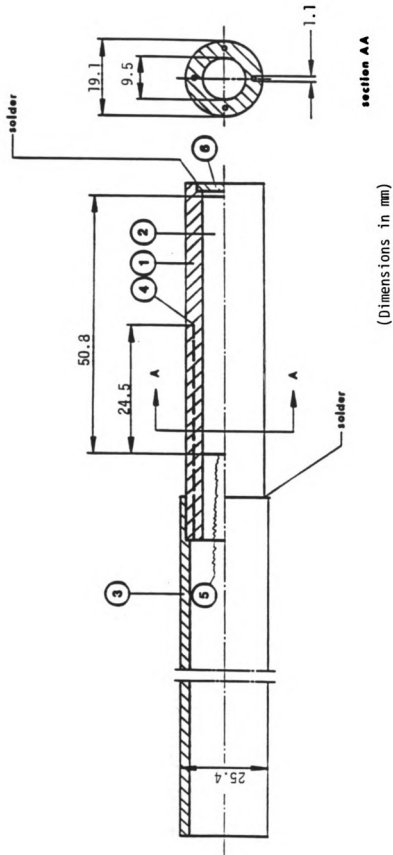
Plain copper tube test section #2. Legend: 1-Boiling Surface, 2-Cartridge Heater, 3-Stainless Steel Support Sleeve, 4-Thermocouple Well, 5-Electrical Leads, 6-End Plug.
